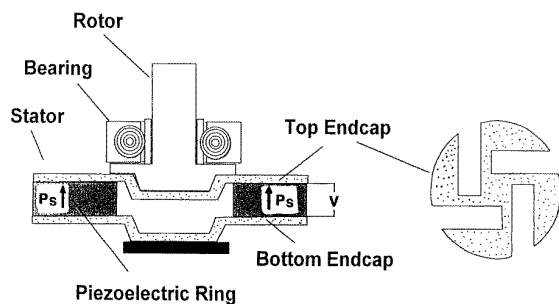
'Windmill' motor with a disk-shaped torsional coupler.
